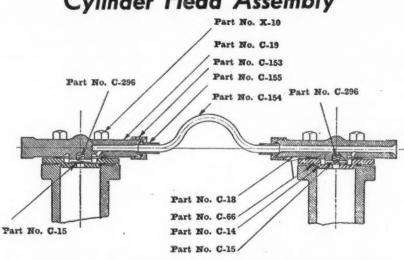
Cylinder heads showing disc valves and reseating springs.
